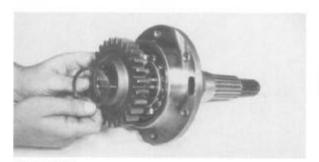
Remove turbine shaft gear retainer ring and gear. See note above.
